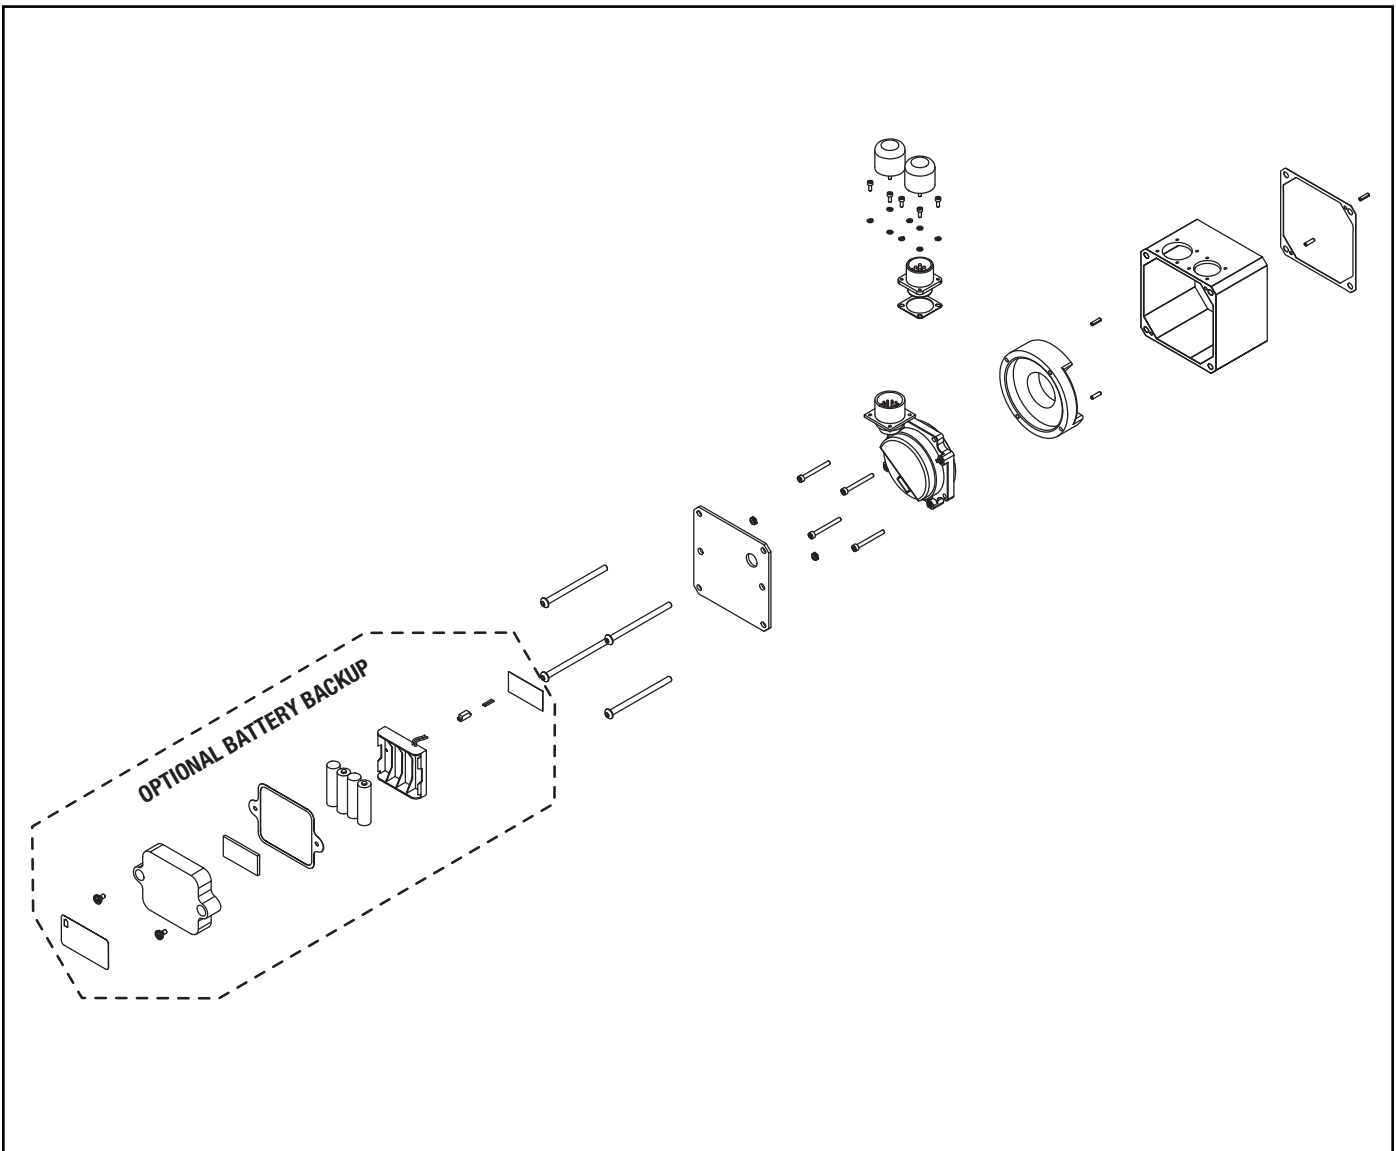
Exploded view of Fanuc Pulsecoder for SW44
